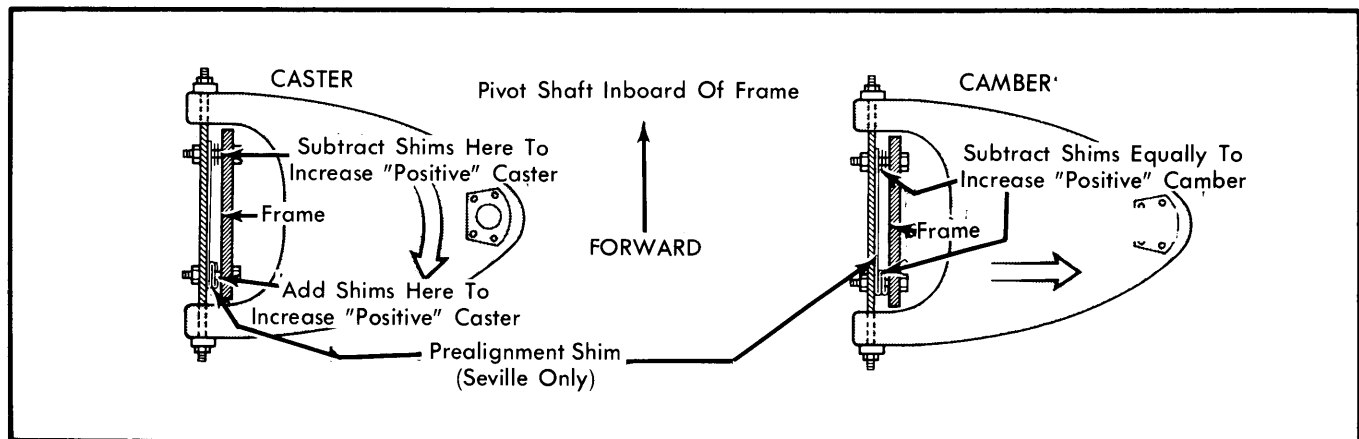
Caster and Camber Adjustment (All Models Exc. Eldorado & Seville)
